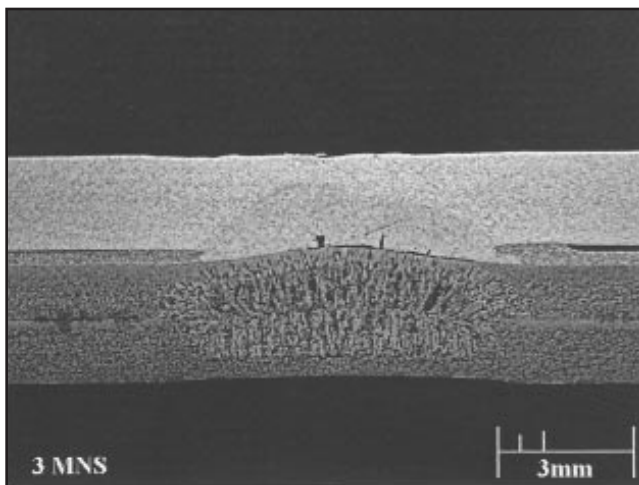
Weld cross section at 12 cycles weld time (1st pulse).
